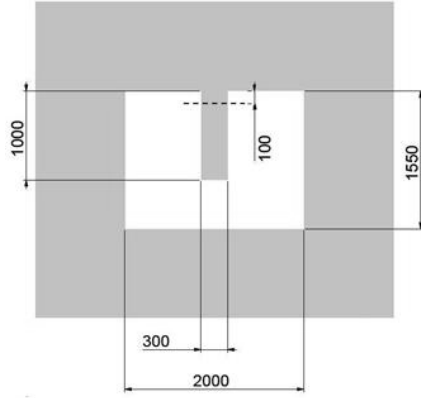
Schematic of stainless steel AISI 302 actuator style arms, with dimensions in μm
